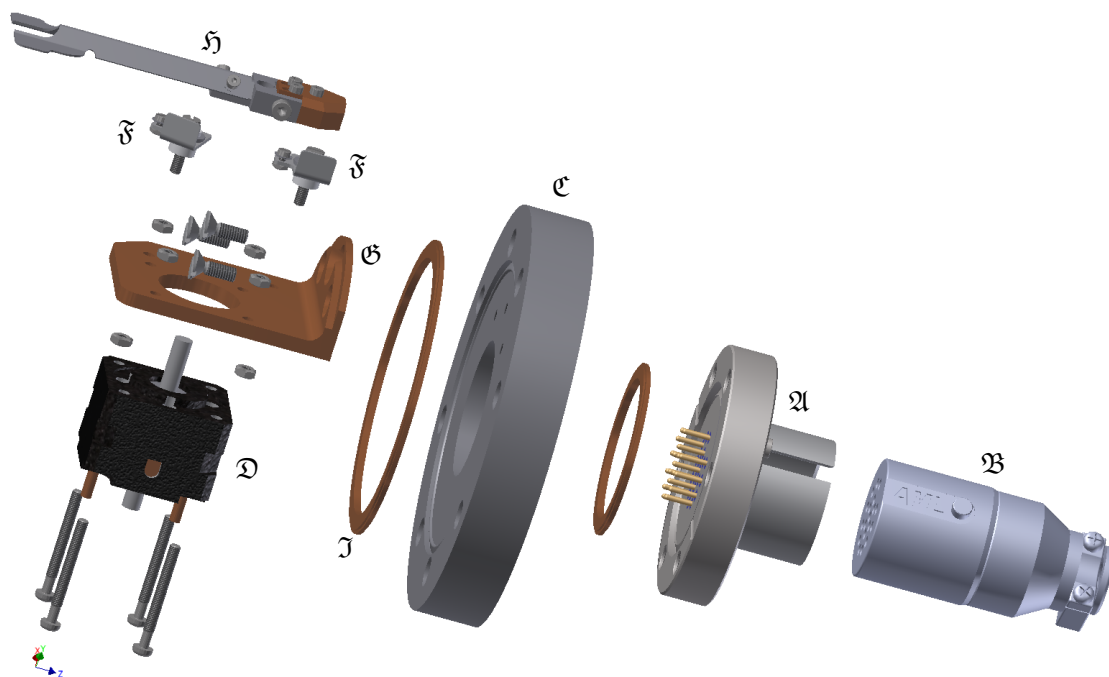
Assembly of the Chopper — A standard multi pin feedthrough^a (A) with the matching air-side connector (B) is fastened to a modified zero length 63CF/40CF adapter (C). The stepper motor^b (D) driven by a programmable controller^c (not shown) is mounted together with two end switches (F, Figure 2.20) onto a copper strap (E) attached to the adapter flange (C). The shutter blade (H, Figure 2.21) is clamped on the axle of the motor (D). A wide bore copper gasket (G) is necessary to mount this assembly.
